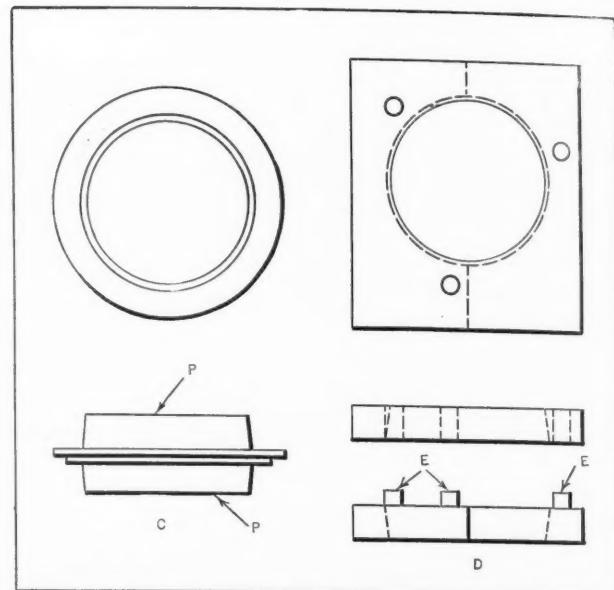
Pattern and Core-box Used in Producing Cover Shown in Fig. 1
